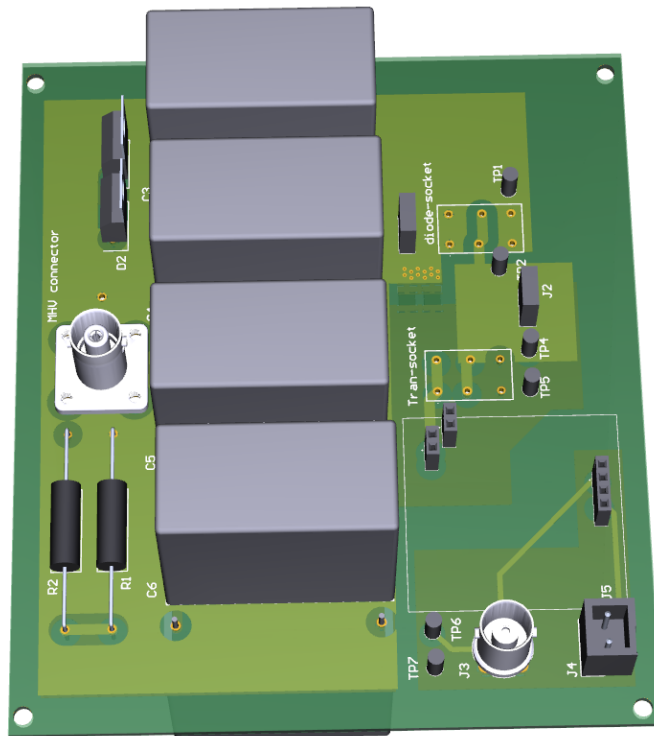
The 3D view of PCB layout for the 1200 V double-pulse board.
